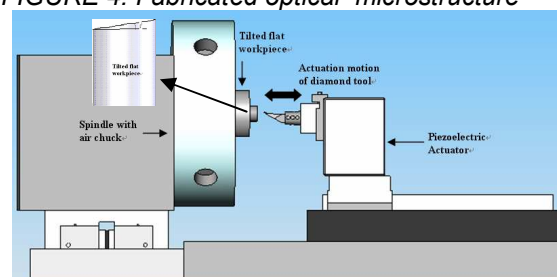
Fabrication of tilted flat surface by ultra-precision machining with FTS
